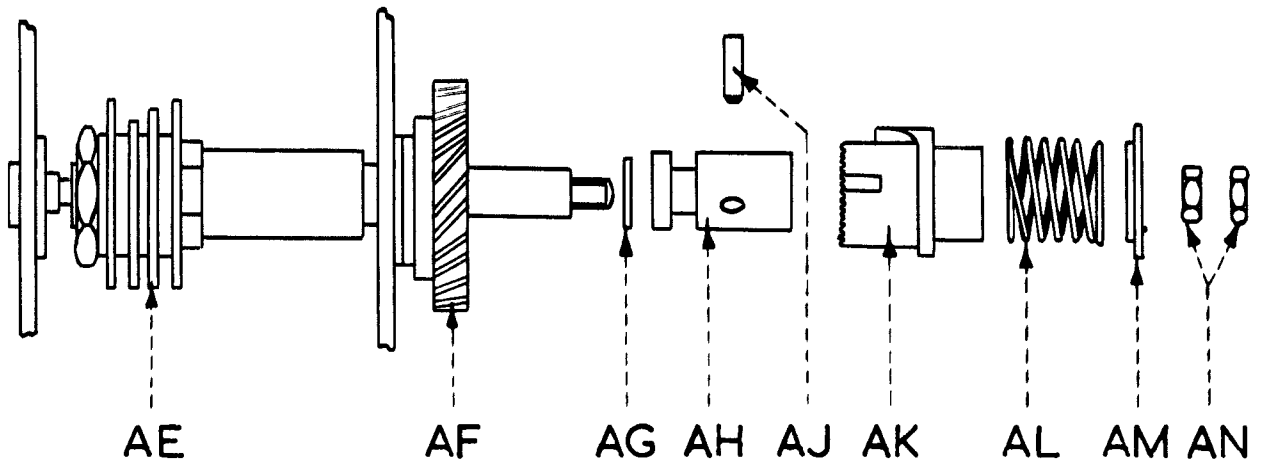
CAMSHAFT ASSEMBLY (EXPLODED VIEW)
